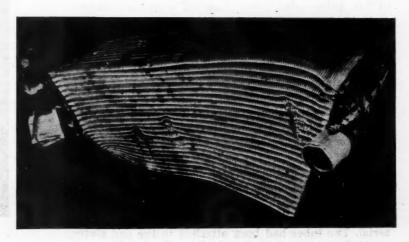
Ju 88 radiator, Type B, with casing removed.
